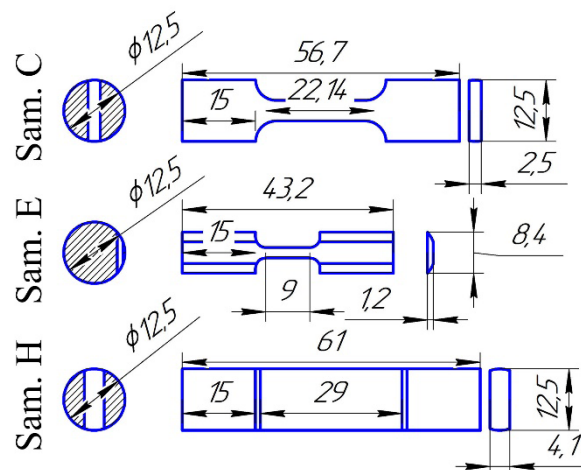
Uniaxial tensile specimen cutting scheme and dimensions (mm) for:
